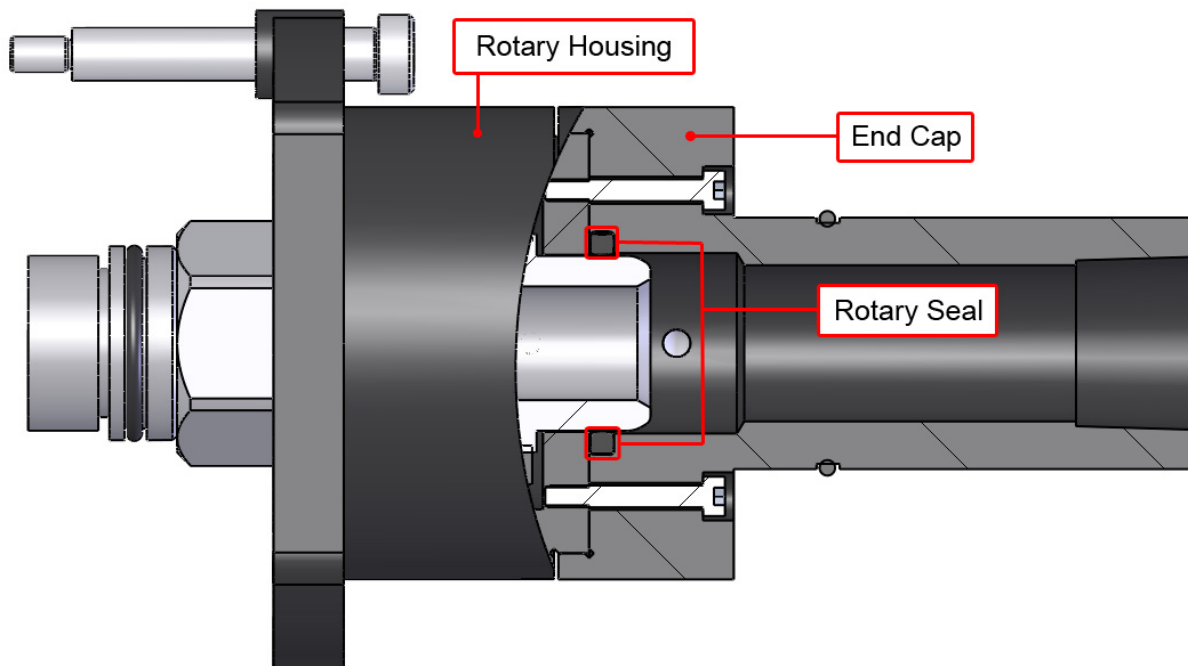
Cross-Section View of Wet Cut Rotary Union
